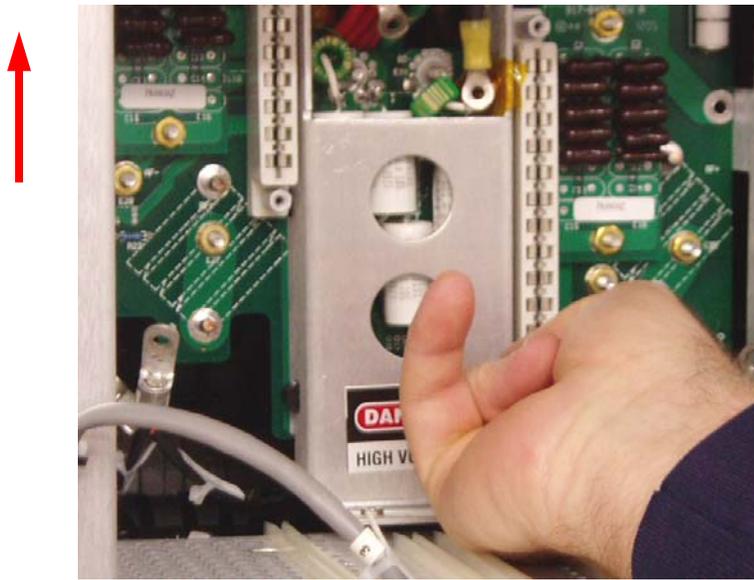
Gently Flex Coils (both sides) to Clear Mounting Screw Bosses
